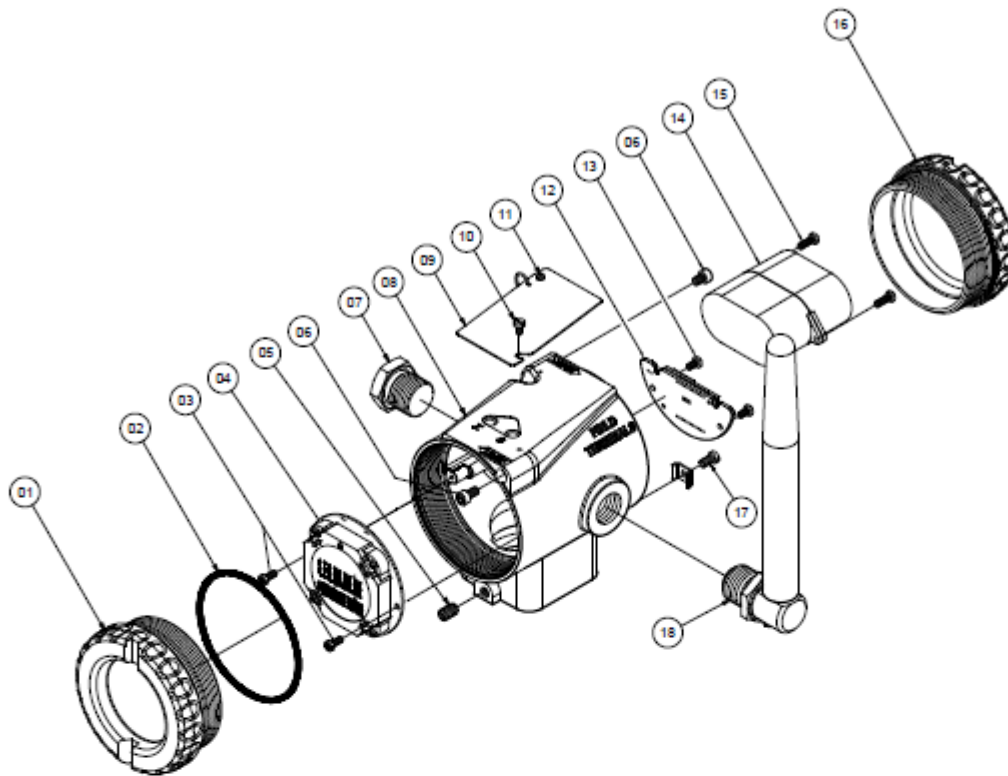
(b) – Exploded View – Gage, Flow, Absolute and High Static Pressure Transmitter
